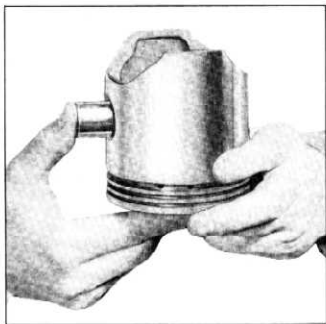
Fitting Piston Pin—Cast Iron Piston
